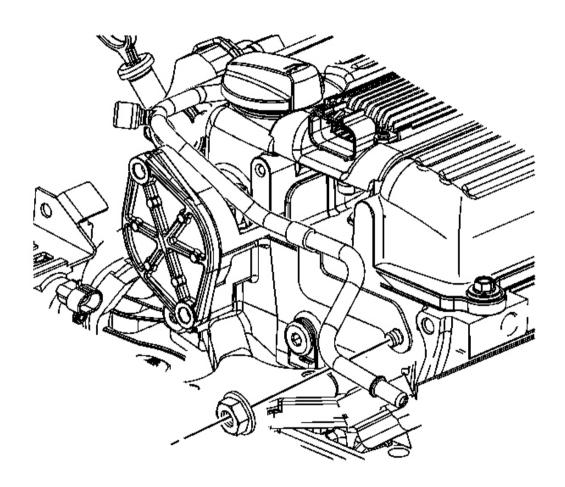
View Of Fuel Rail Bracket Courtesy of GENERAL MOTORS CORP.
